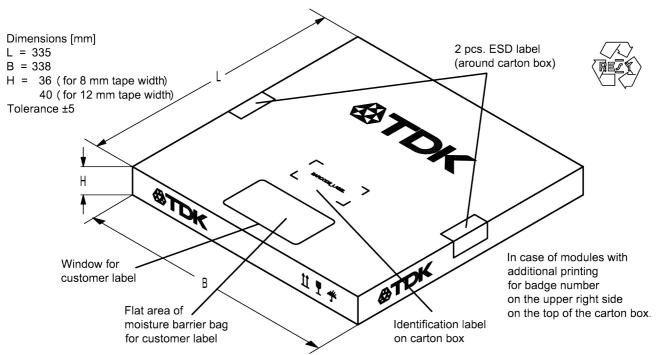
Drawing of folding box for reel with diameter of 330 mm.
